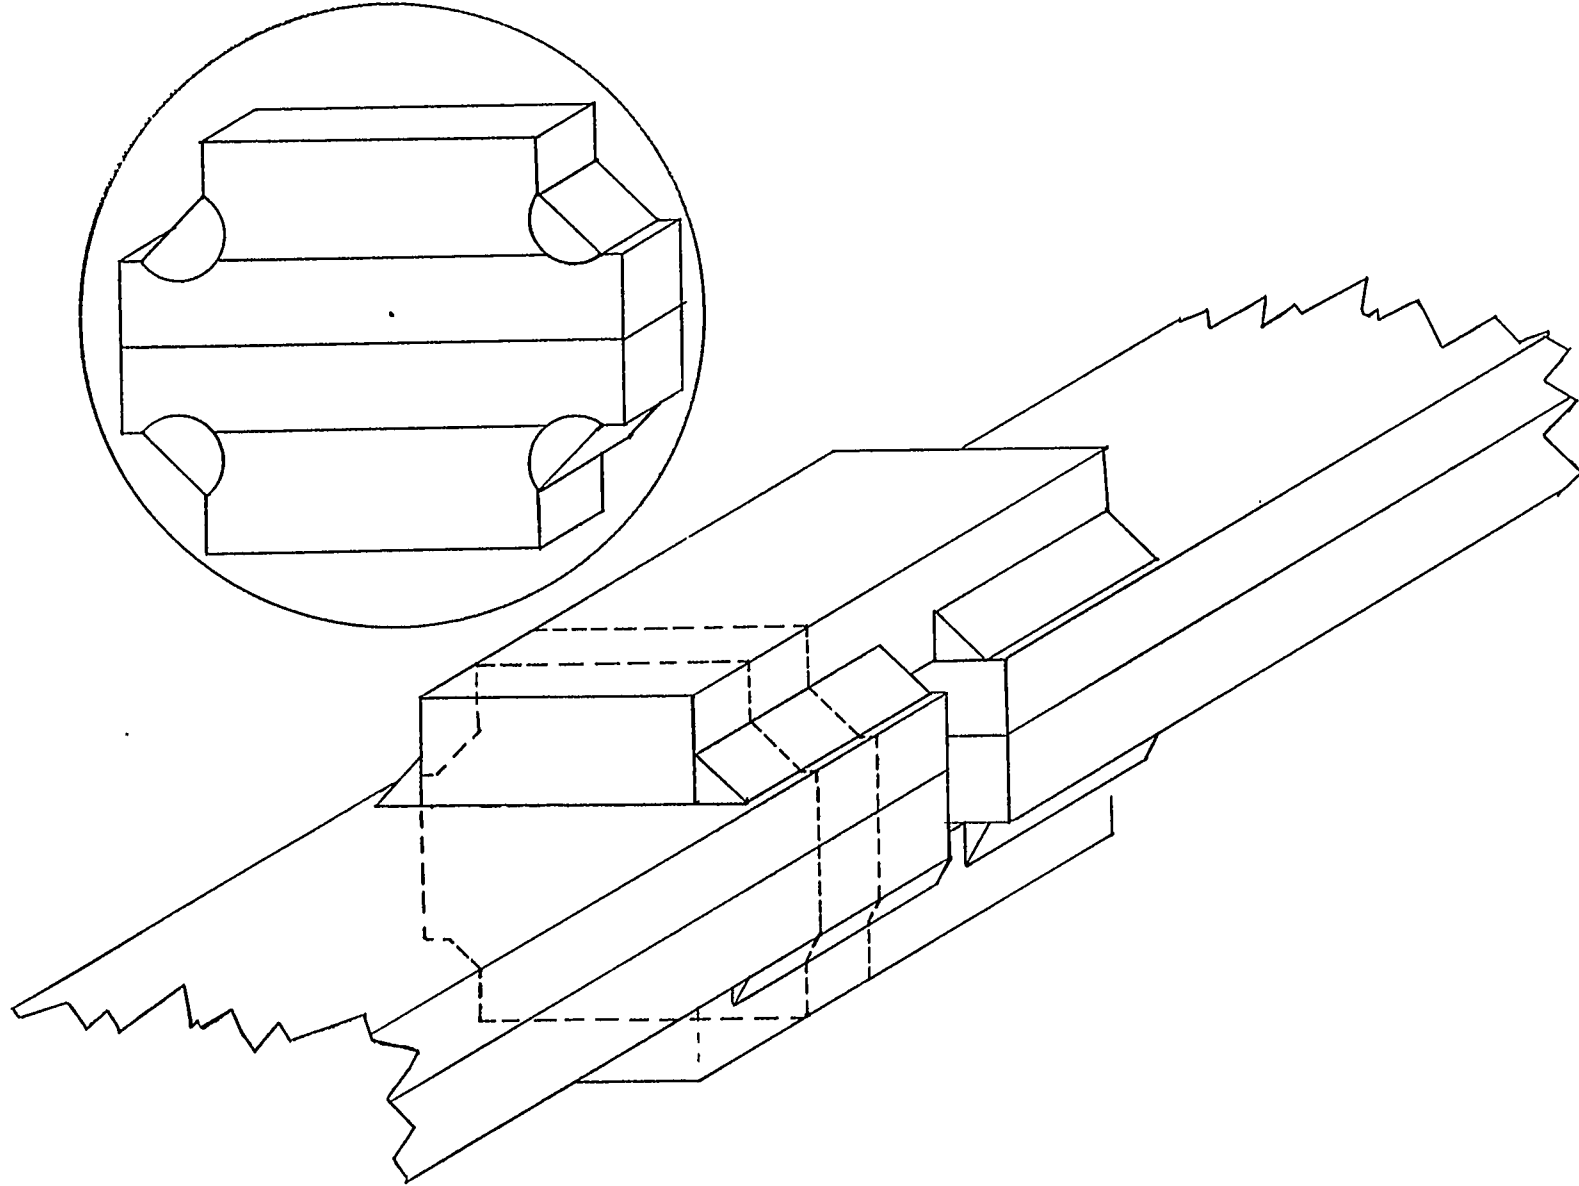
Typical Cross-Section Used for Macroetch of Longitudinal Fillet Weld Test Specimen
